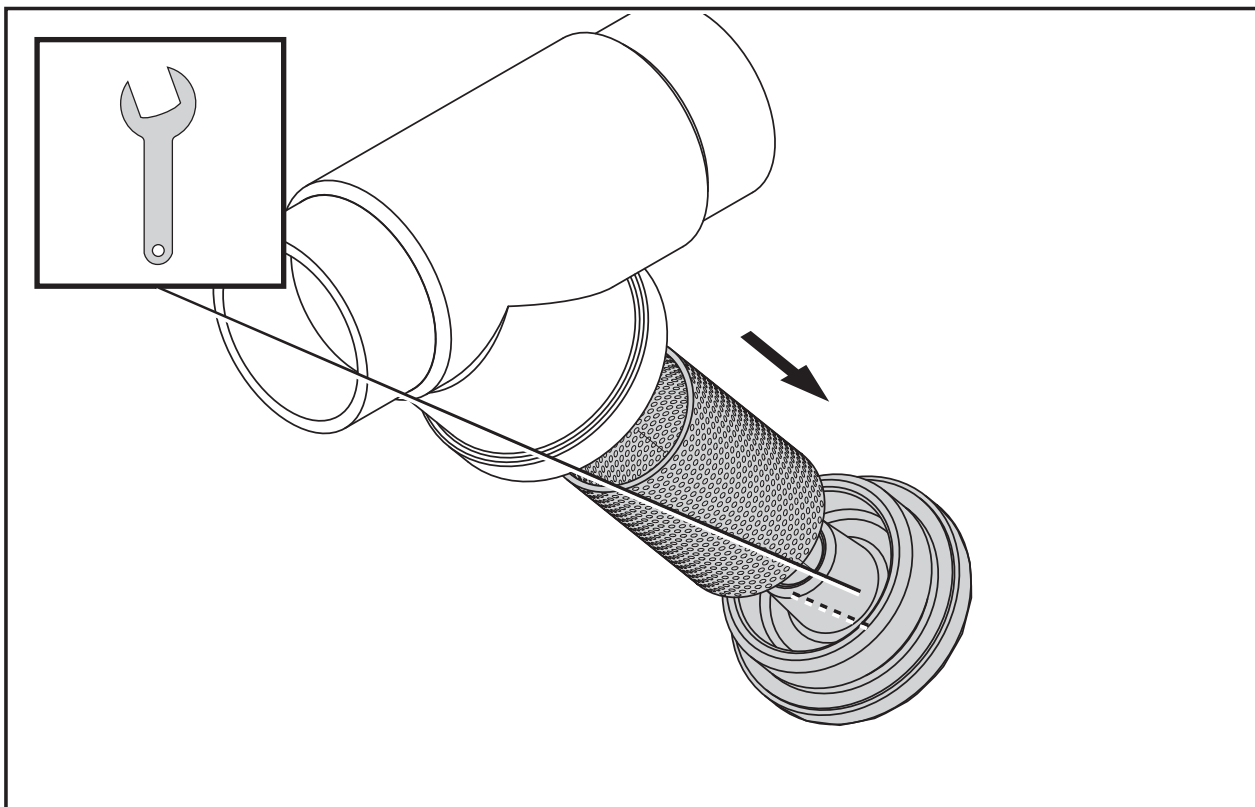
Y-strainer, disassemble of the bonnet (Fig. : Art. EA300064)
